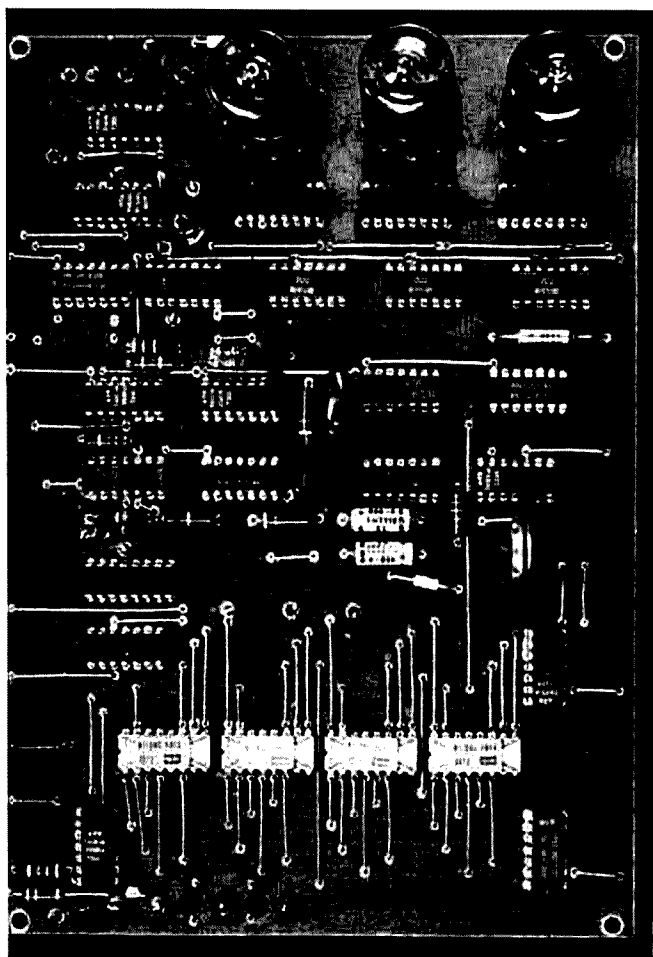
PC layout (shown half size) for the RTTY memory is designed for DIP-packaged ICs. Numitron readouts plug into CJ9PCB1 sockets which are soldered to the circuit board.
